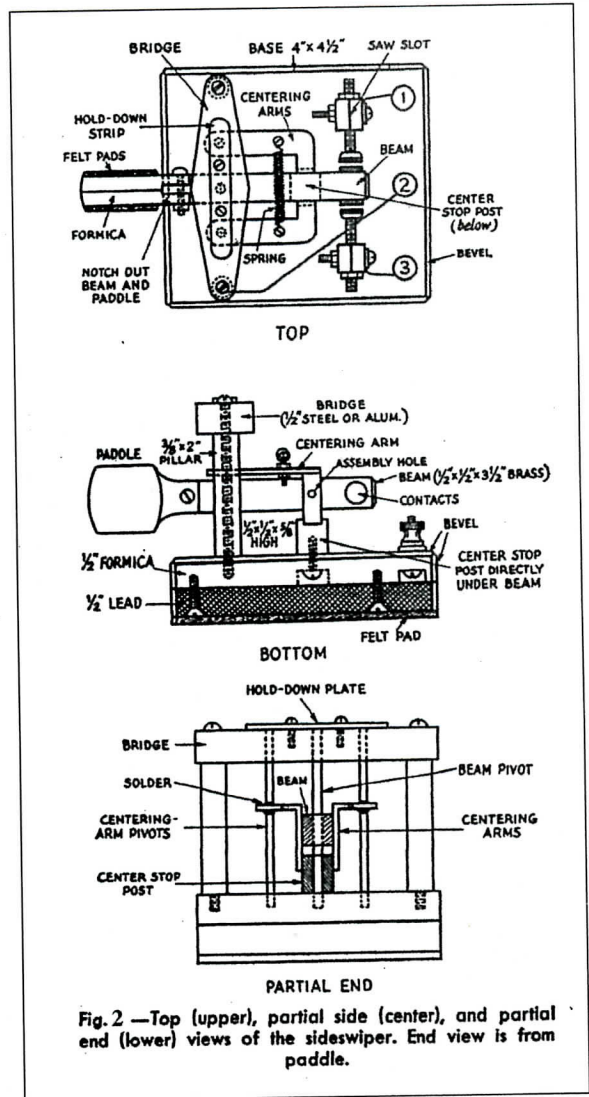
Top (upper), partial side (center), and partial end (lower) views of the sideswiper. End view is from paddle.
